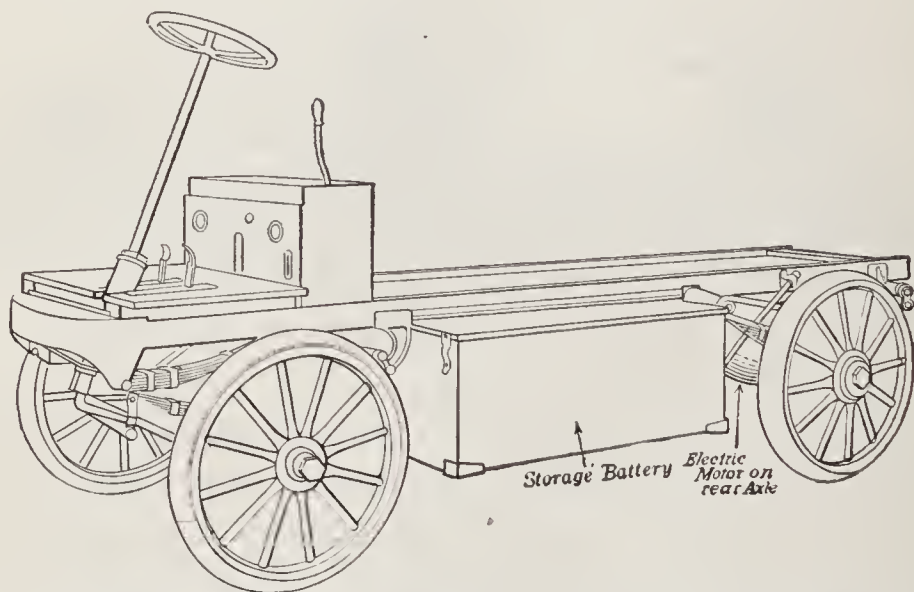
Side view of chassis of electric truck with underslung battery and motor built into rear axle.
